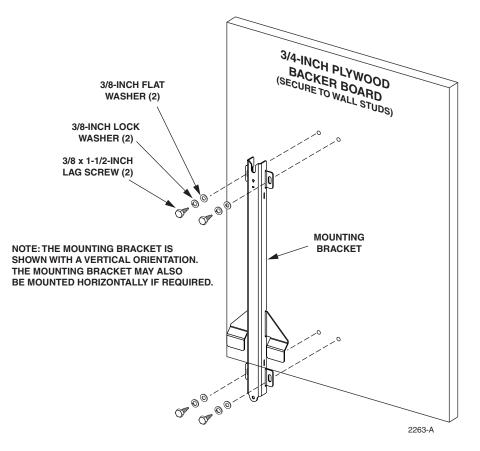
Secure Standard Mounting Bracket To Plywood Backer
